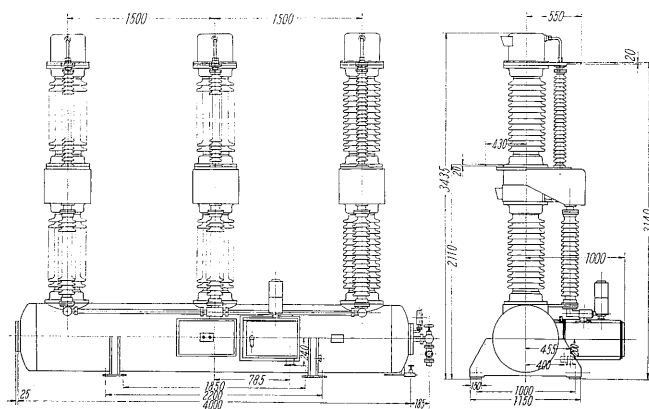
Outline dimensions of 72/84 kv air blast circuit breaker
